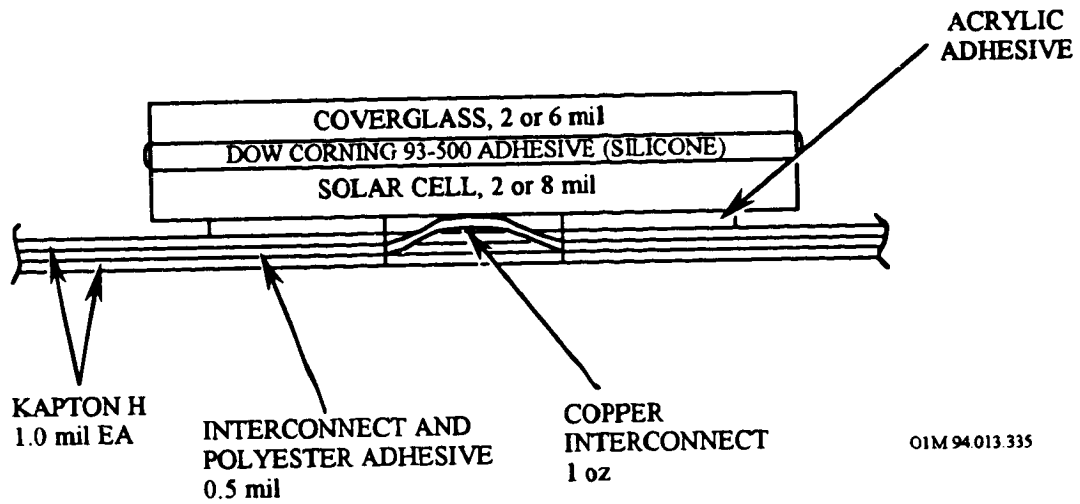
Cross-sectional Sketch of MSFC SAMPLE Solar Cell Test Assemblies
